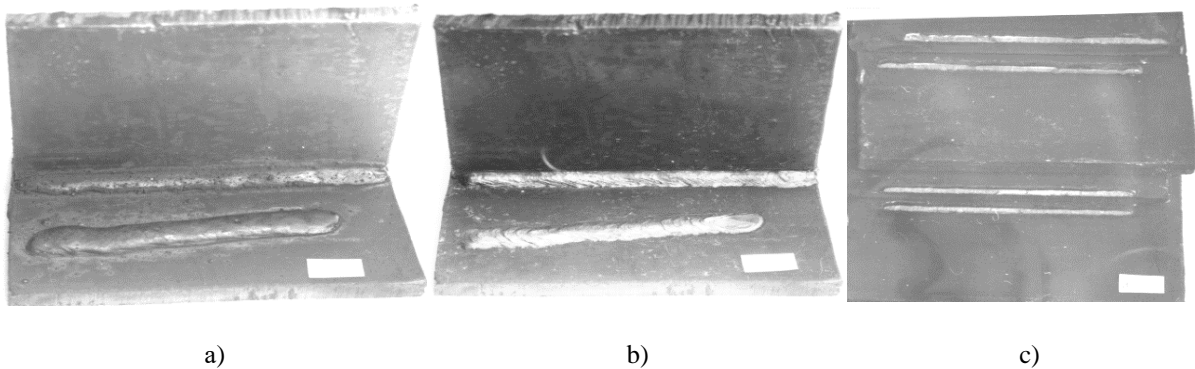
Bead appearance and a fillet weld (a) weld bead smallscaly formation (b) kinks fillet welds (c) formed researched ($d_e = 5,0 \text{ mm}$) electrodes type ET-2 with exothermic mixture in a coating
